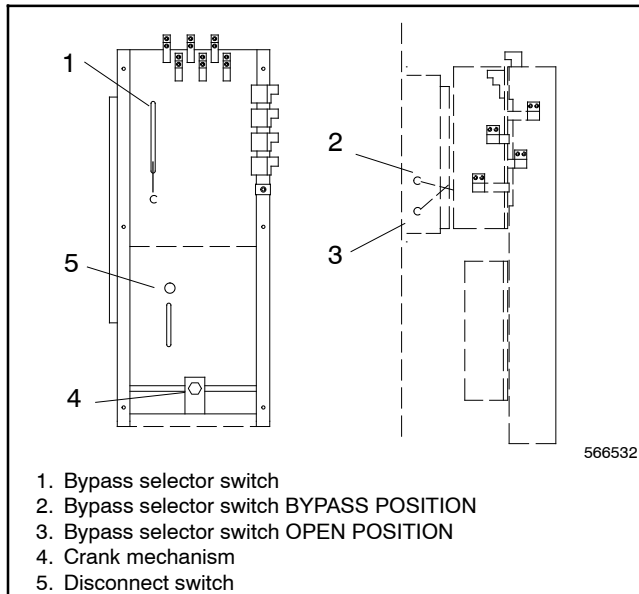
Bypass Switch Crank Mechanism Location, 600-1200 Amp Switches
